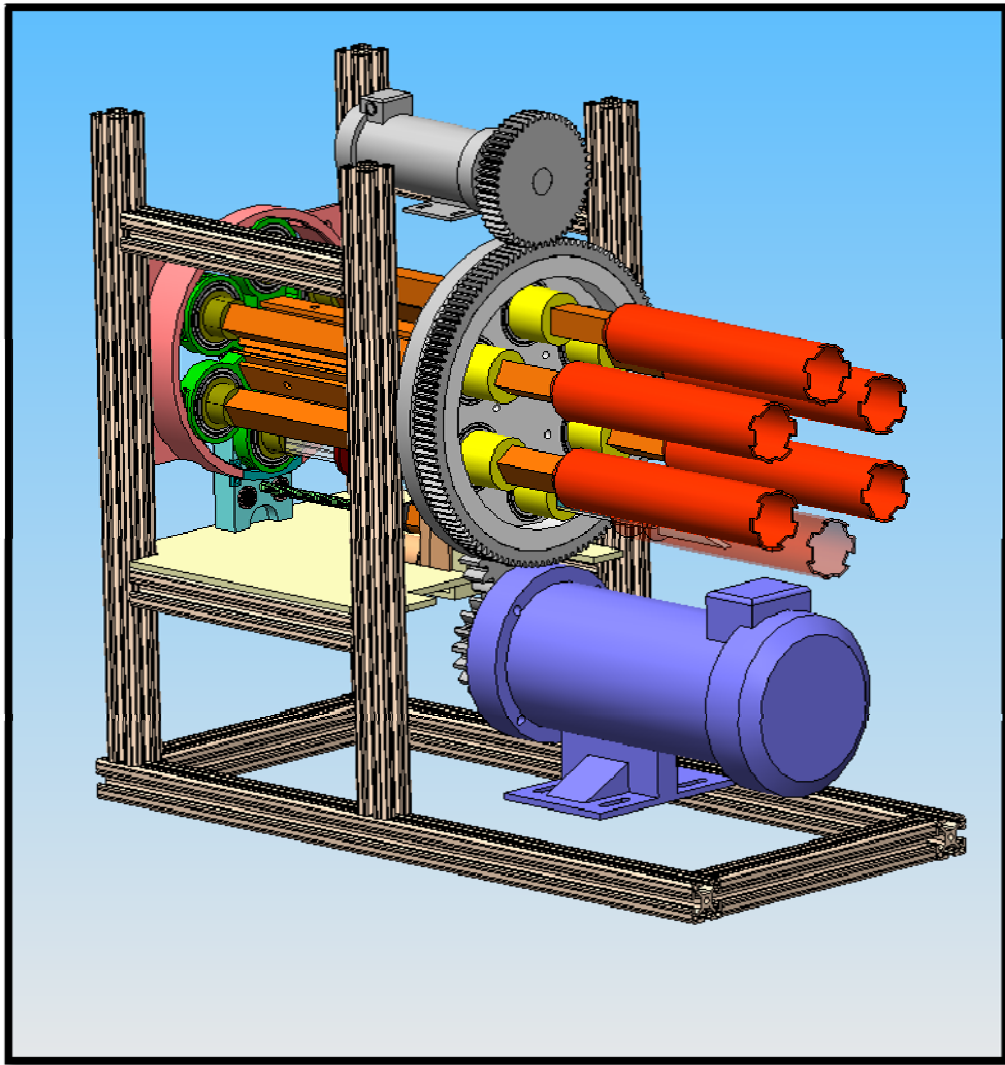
Frame for the core drill mechanism plus 8020 aluminum skeleton.
